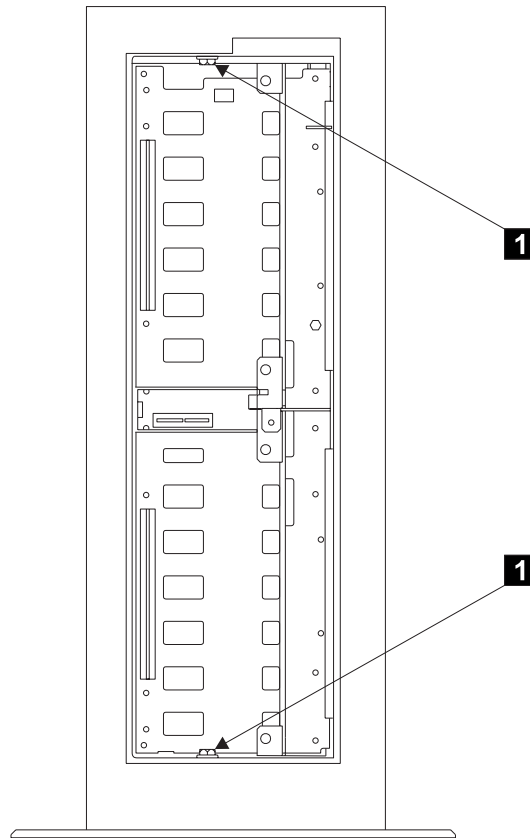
Removing the Frame from a 2104 Model TU3 (2)
